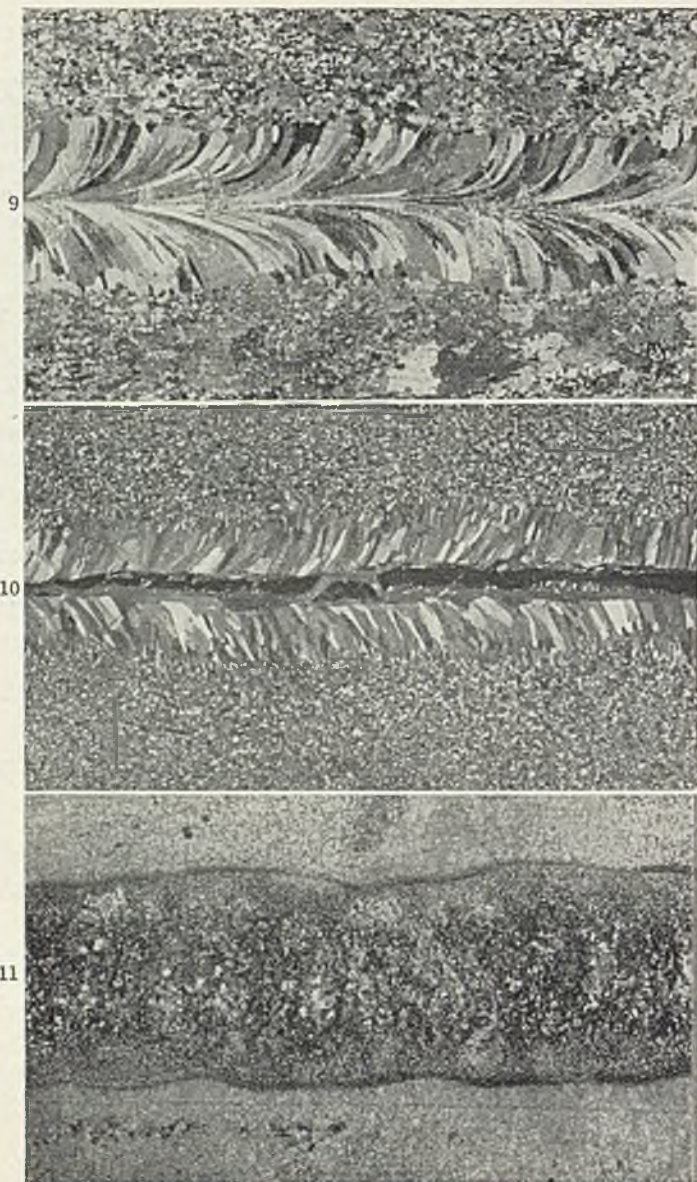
Macrostructure of Restrained Weld in Super-Pure Aluminium.
